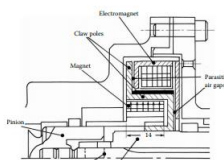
Base claw pole actuator assembly. (Courtesy of Delphi Corp.)
